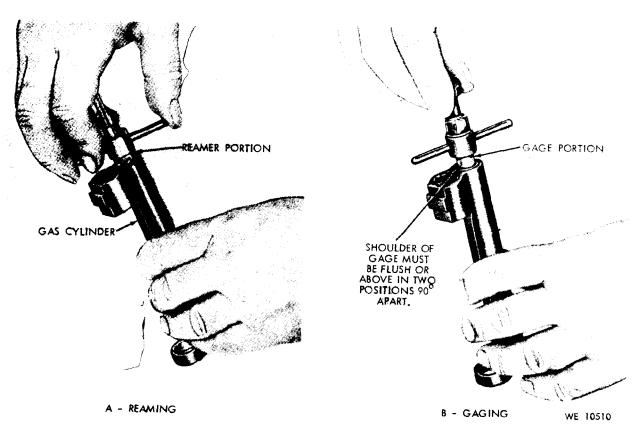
Use of gas cylinder diameter plug gage 7319919.
